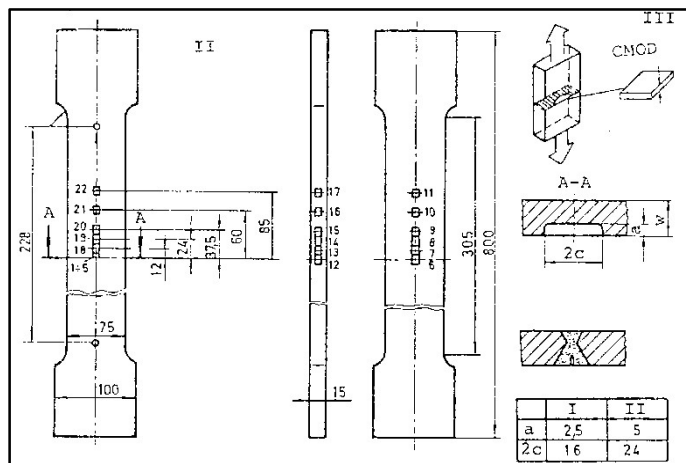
Pre-cracked specimens (I – 3PB; II - tensile panel, III - details of surface cracks on tensile panels)
